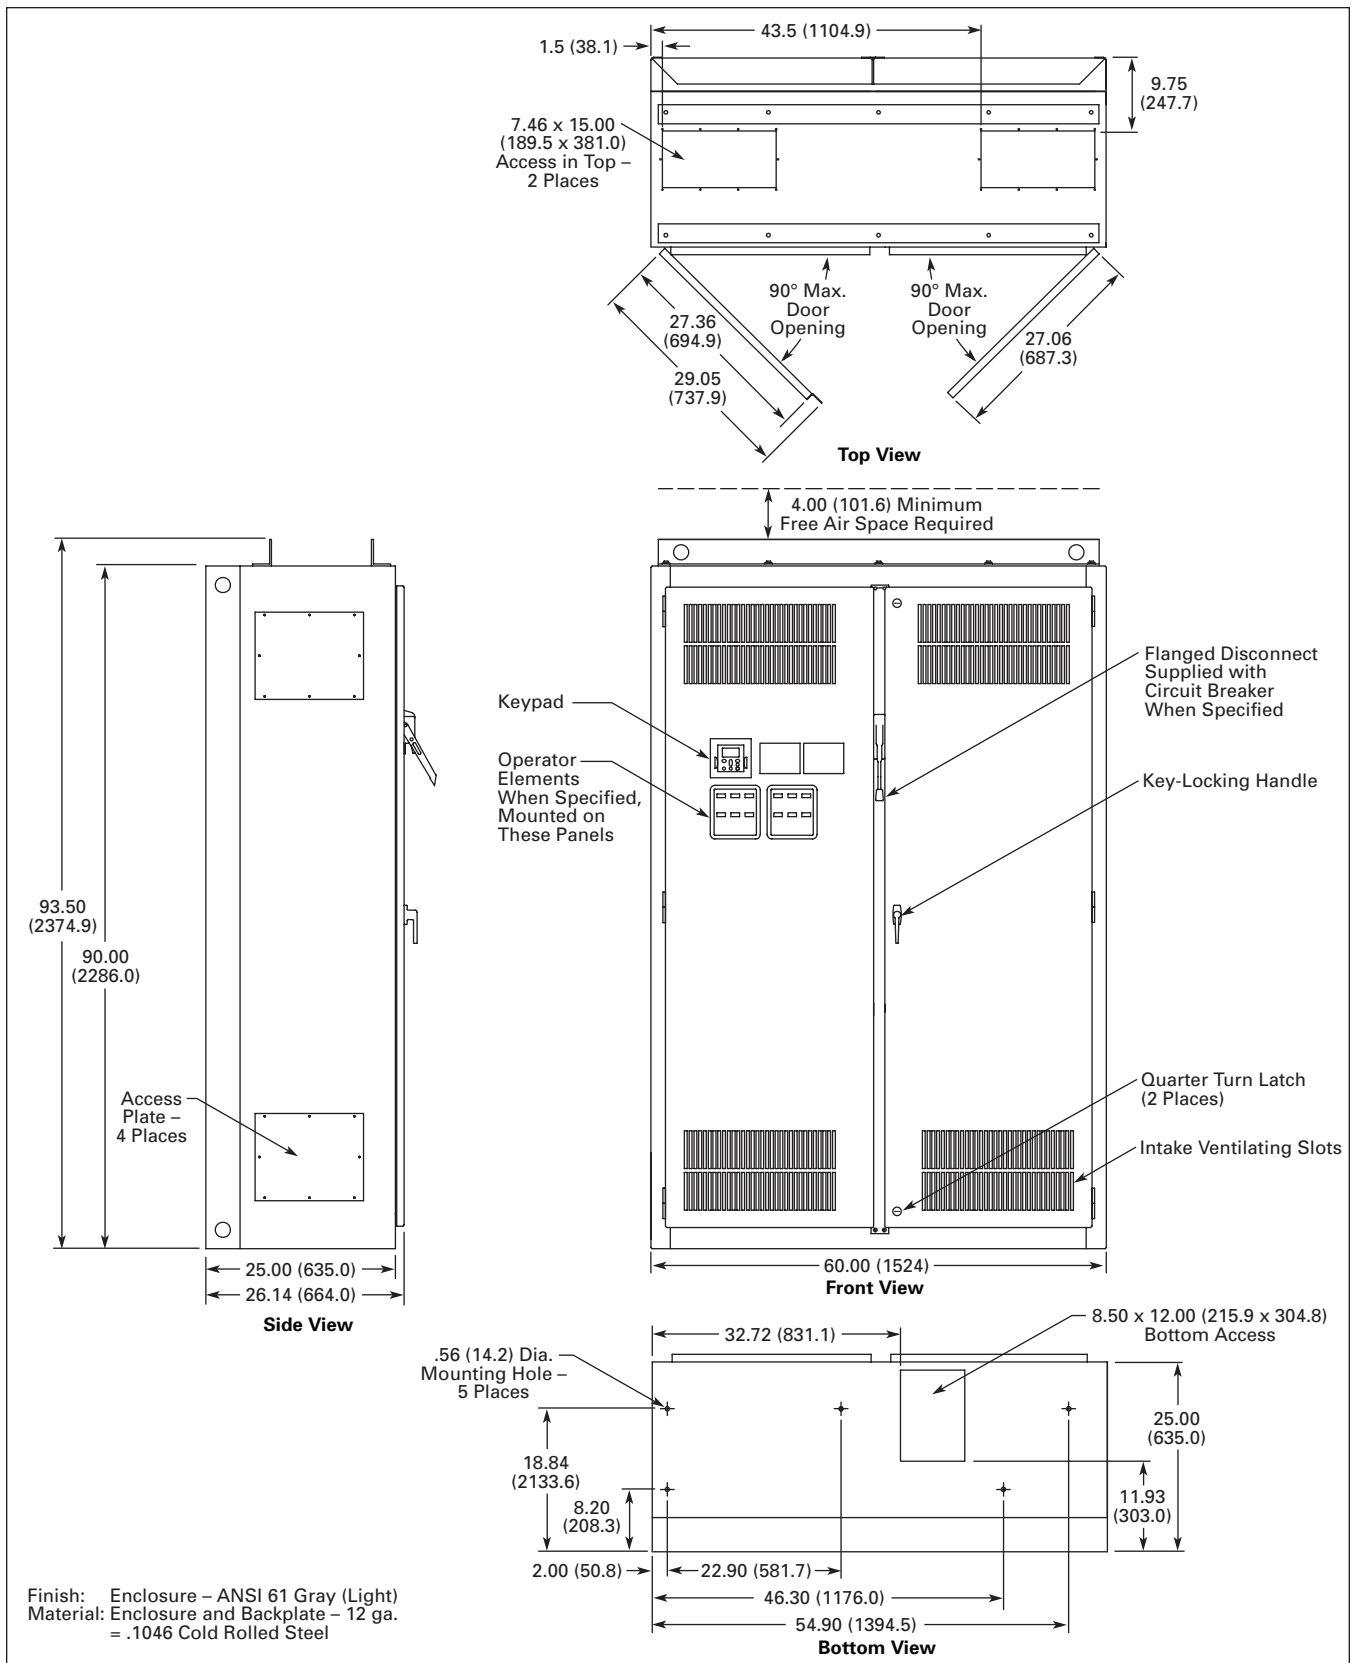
Enclosure Size 9, 250 - 350 hp CT/300 - 400 hp VT, Approximate Dimensions in Inches (mm)
